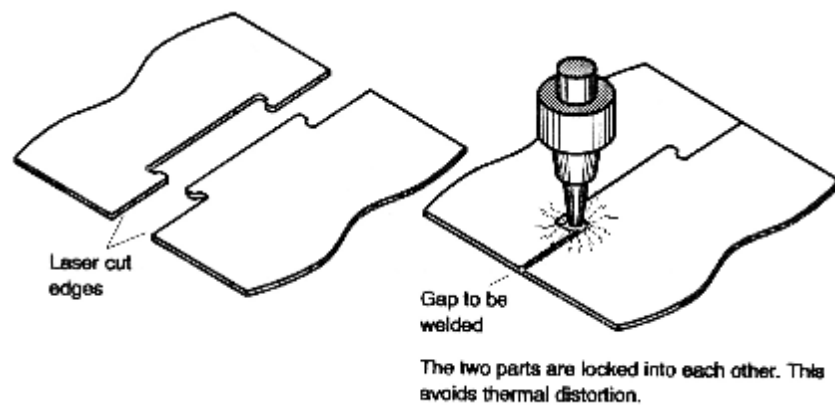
Principle of Self-Fixturing of the Weld Components (Kristensen et al., 1994)
